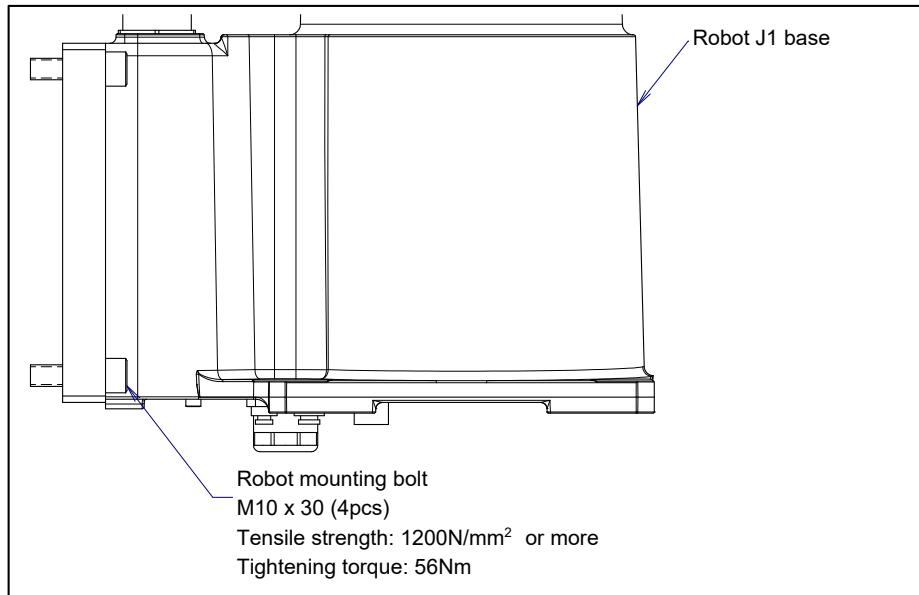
(d) Installation Example (wall mount) (SR-6iA, SR-6iA/H/C)
